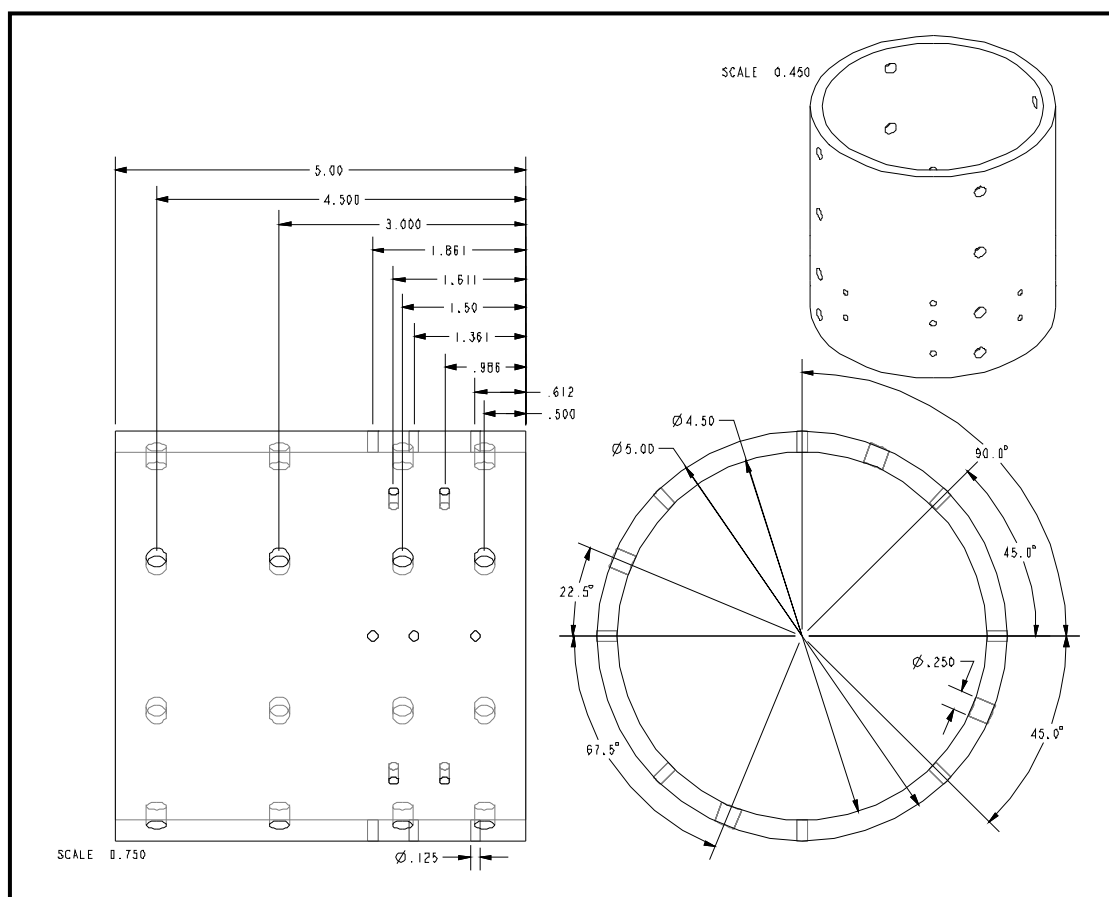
CAD Drawing of the Multi-Sampling Port JSR Mold – Outer Shell
